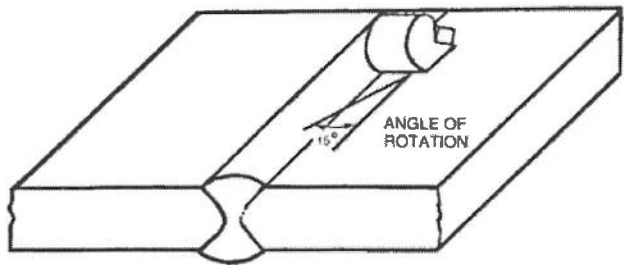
Supplementary Technique 3, for Inspecting Butt Welds for Suspected Cross-Cracking when the Weld Bead is not Ground Flush
